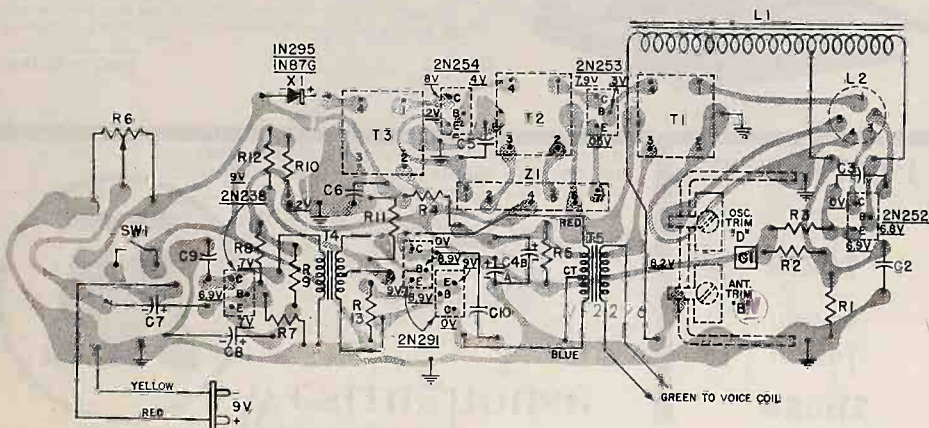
BOTTOM VIEW OF PRINTED BOARD SHOWING TOP COMPONENTS SYMBOLICALLY
